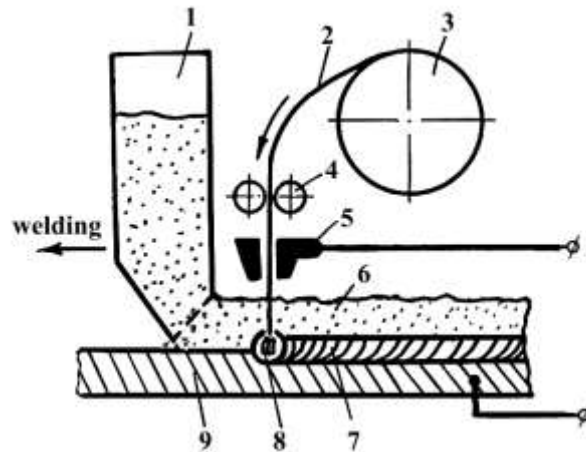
Automatic welding by a welding tractor: 1-tank for a flux; 2-wire; 3-cassete; 4-rolls for wire supply; 5-guide sleeve; 6-flux layer; 7-weld; 8-arc; 9-base metal
